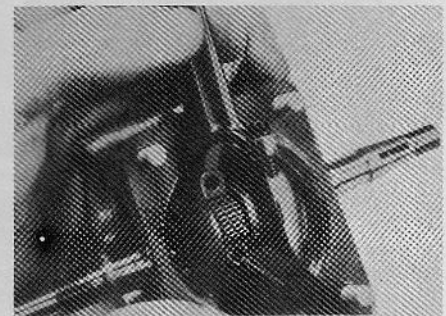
View showing correct method of installing connecting rod using the Pioneer special holding tool.
